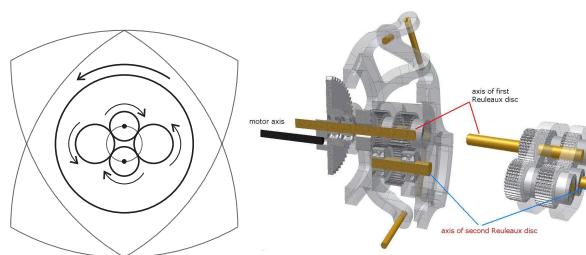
Assembly and movement of the two Reuleaux discs. To the left a diagram, in the middle a cross section of the assembly, and to the right the transmission gear.
